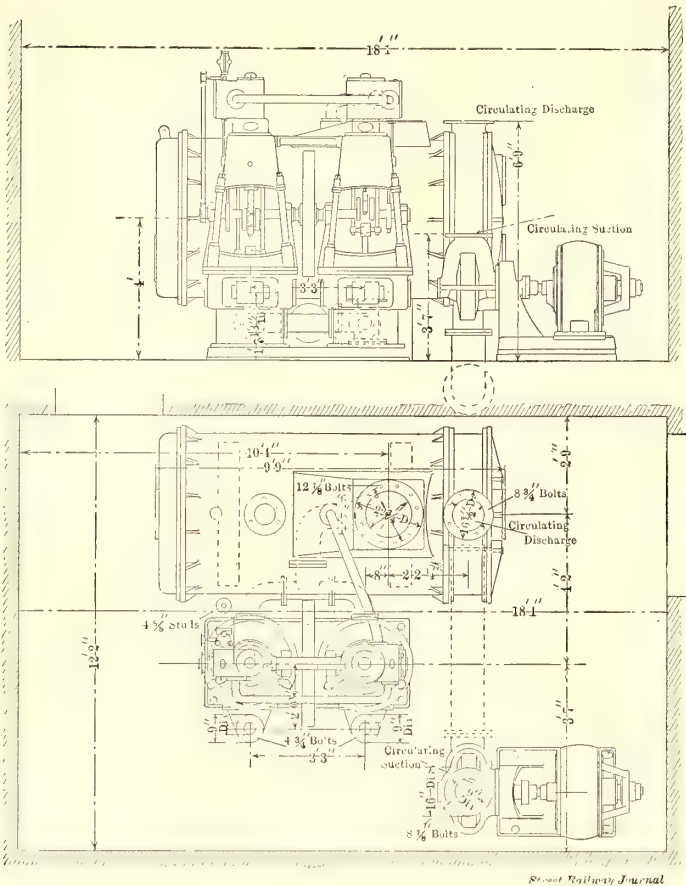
PLAN AND END ELEVATION OF CONDENSER PUMPS
